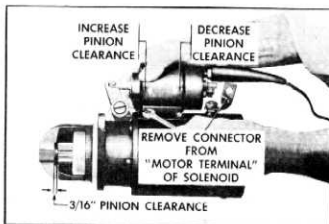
Adjustment of Solenoid for Pinion Clearance
